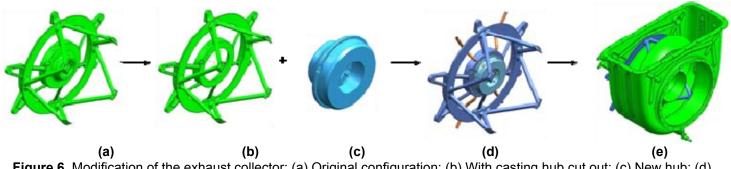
Modification of the exhaust collector; (a) Original configuration; (b) With casting hub cut out; (c) New hub; (d) New configuration with modified hub and cooling air manifold with tubes; (e) Final exhaust assembly.
